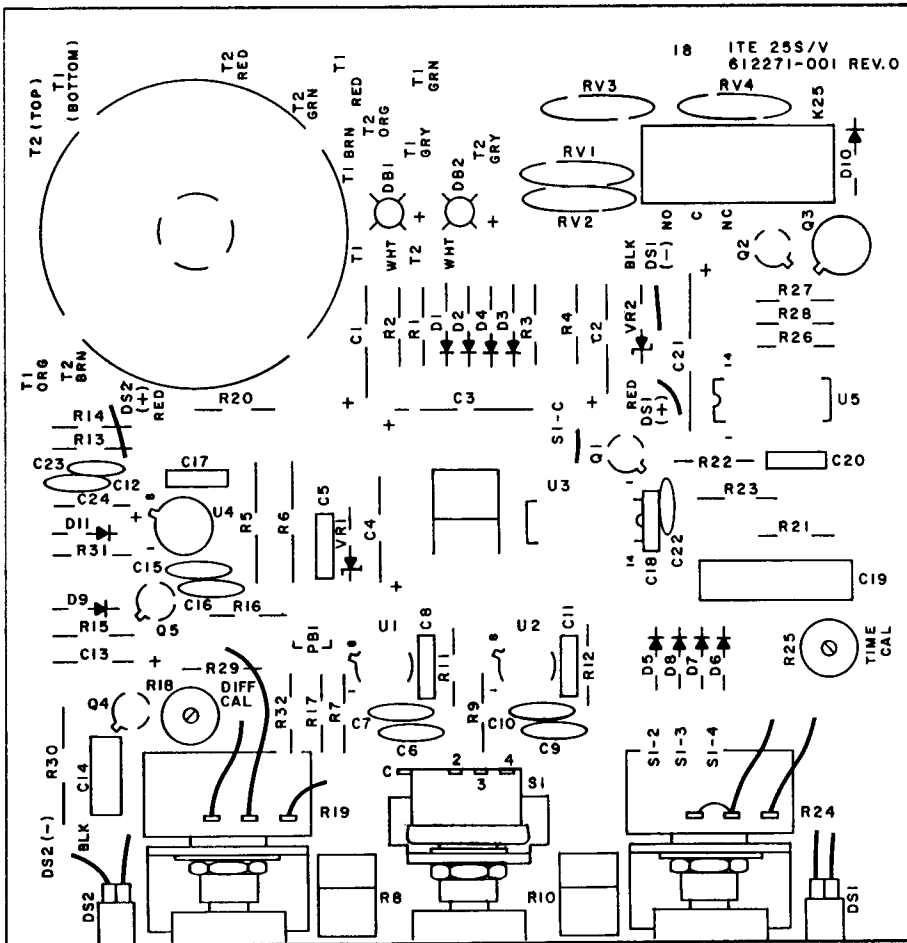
TYPICAL CIRCUIT BOARD LAYOUT
